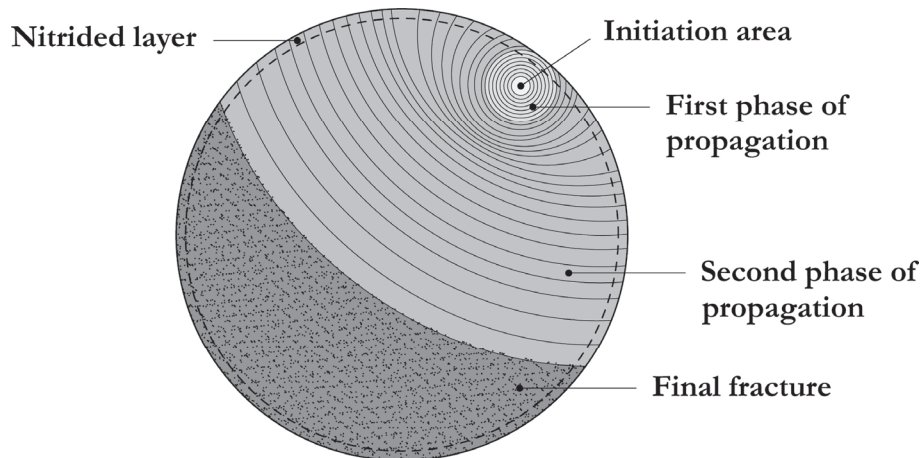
Schematic representation of the fatigue fracture surface of a nitrided specimen.
